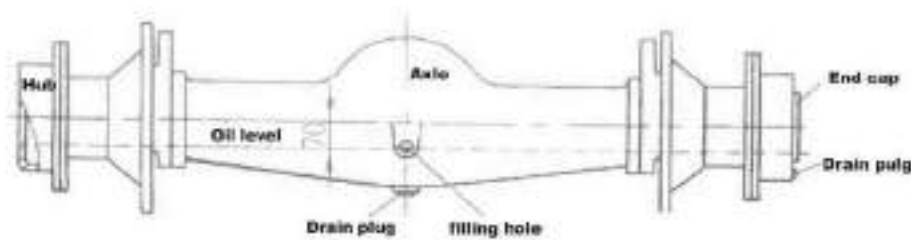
Filling Port and Oil Level in Front and Rear Axle
